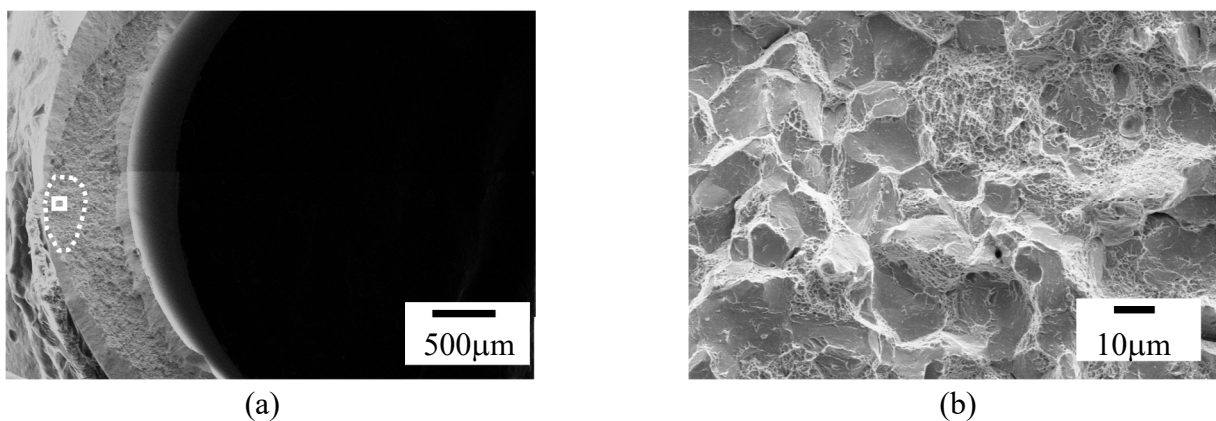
SEM images of fracture surface after tensile test in air; (a) fracture origin, and (b) magnified view indicated by the rectangular area in (a).
